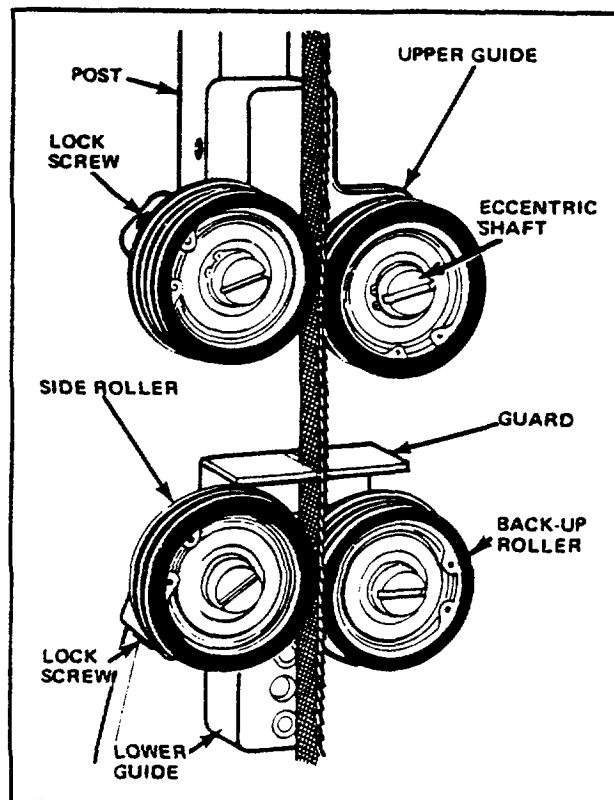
ROLLER GUIDES ALLOW CONTINUOUS HIGH-SPEED SAWING.
